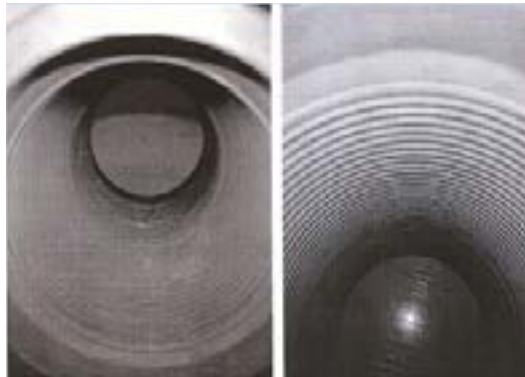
Threaded surface of a coupling with TDG coating after wear resistance tests
